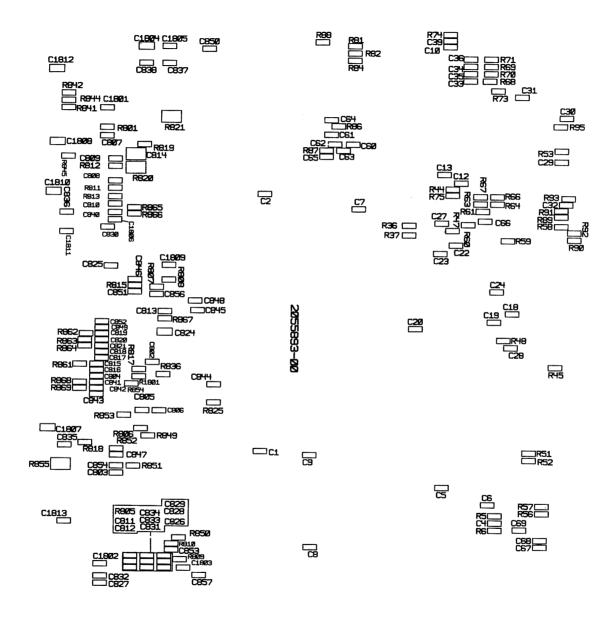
EPL-5900L Main Board Assy (C428MAIN) Back Side
